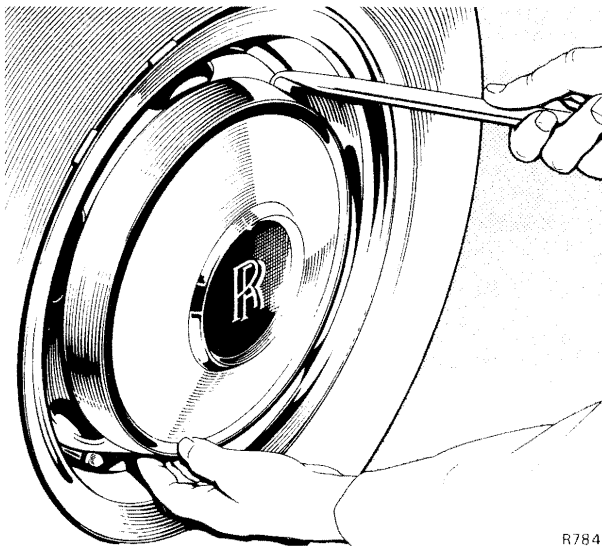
REMOVING A WHEEL DISC (CORNICHE)
